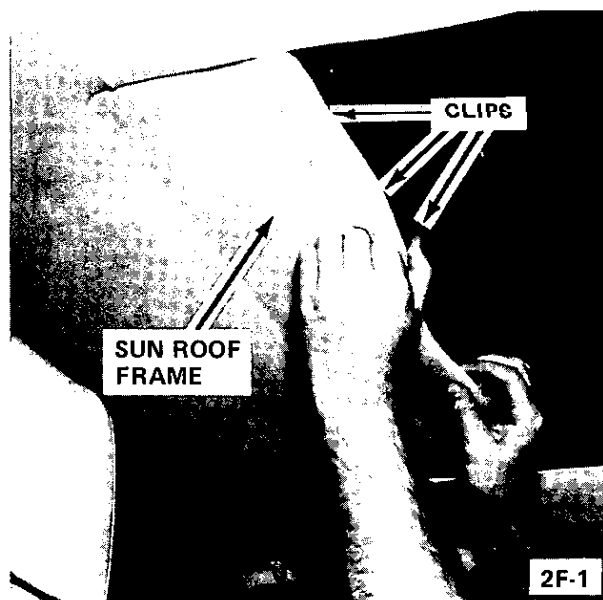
F-1 Separating Sun Roof Frame From Sun Roof Panel
